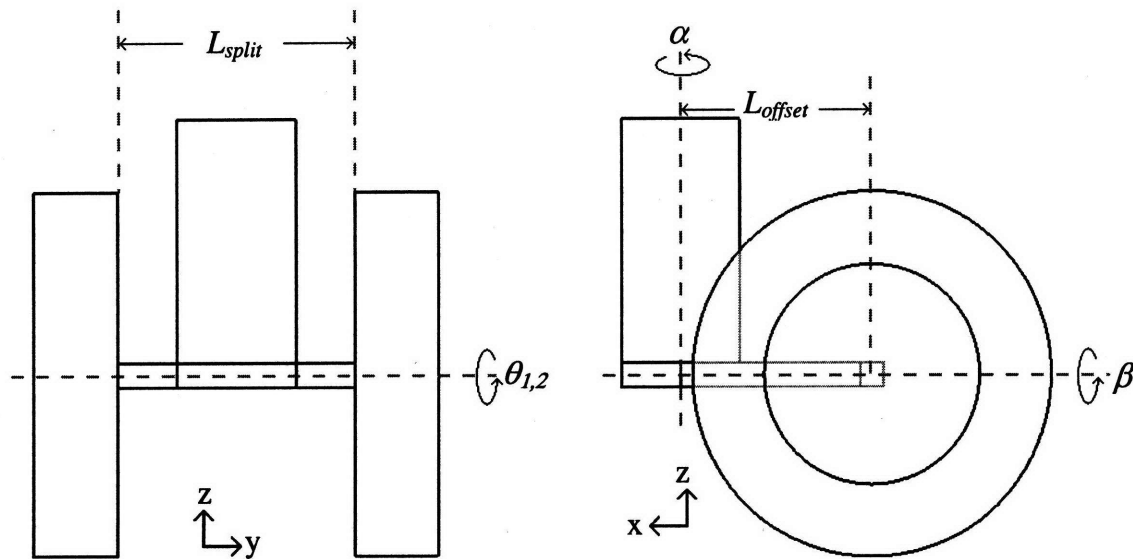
Active split offset caster wheel assembly front view (left) and side view (right).
